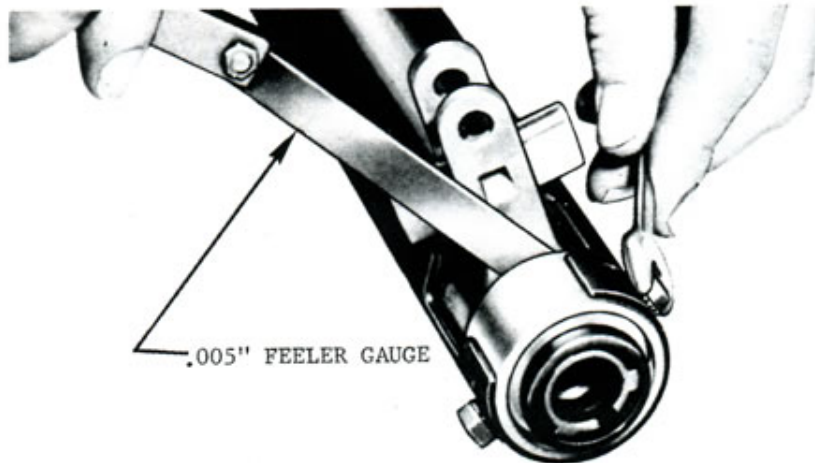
ADJUSTING 1ST-REVERSE LEVER CLEARANCE
